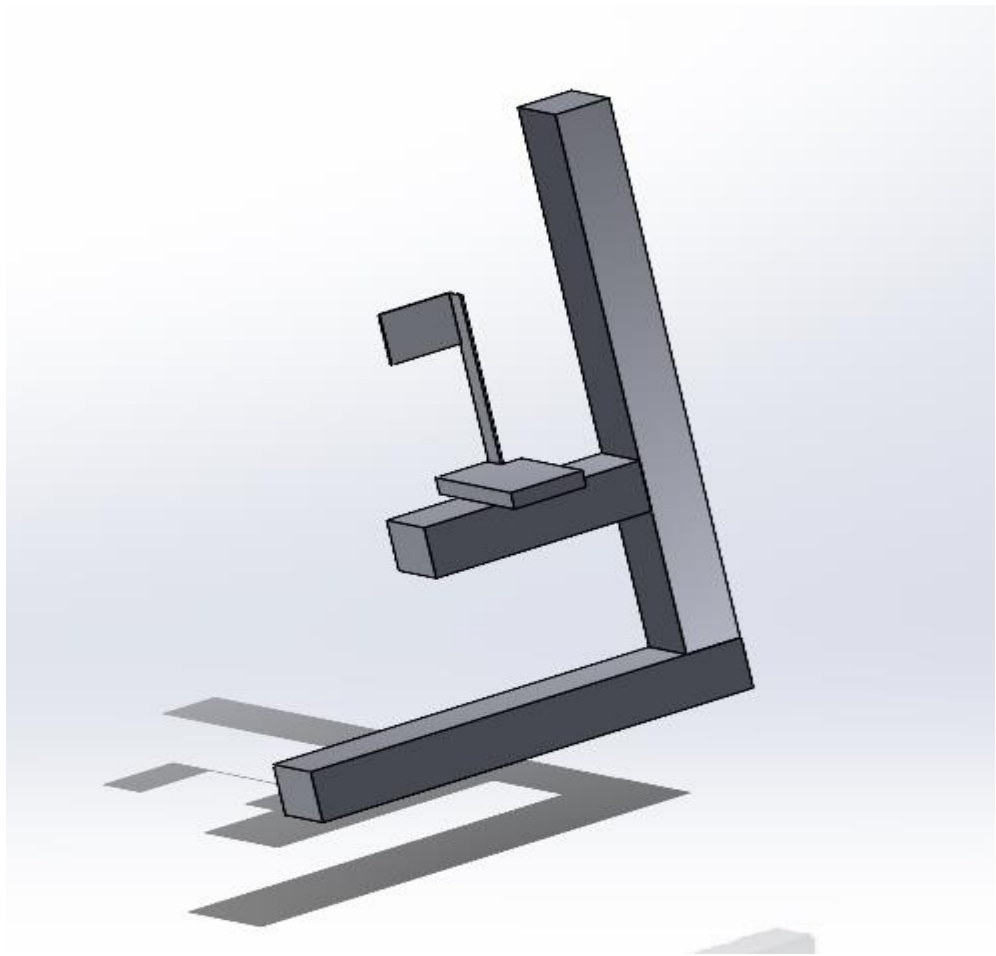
Brackets to hold the Knife-Edge Apparatus
